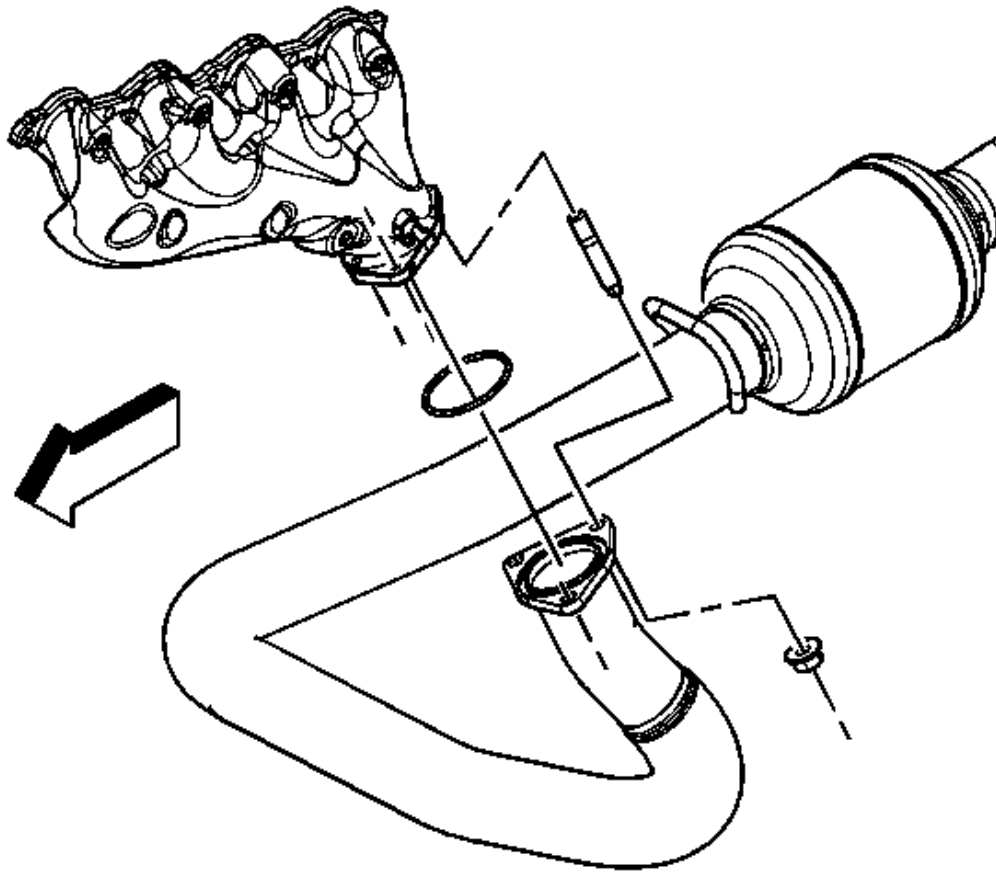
View Of Exhaust Manifold, Bolts, Catalytic Converter & Gasket
